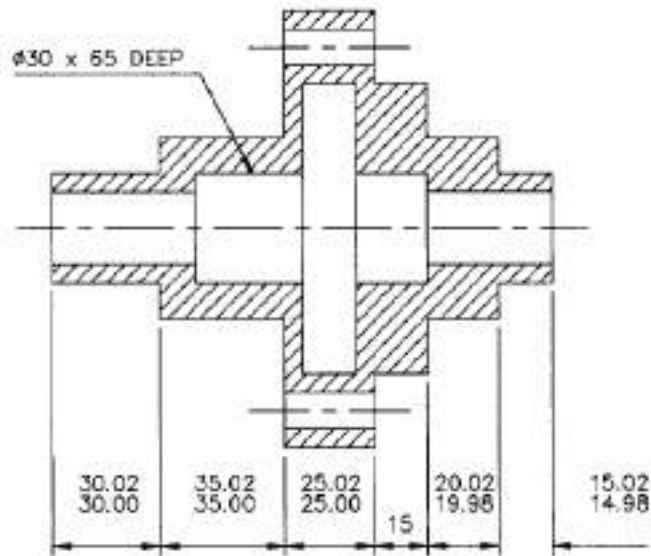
Dimensional tolerances with limits directly stated
